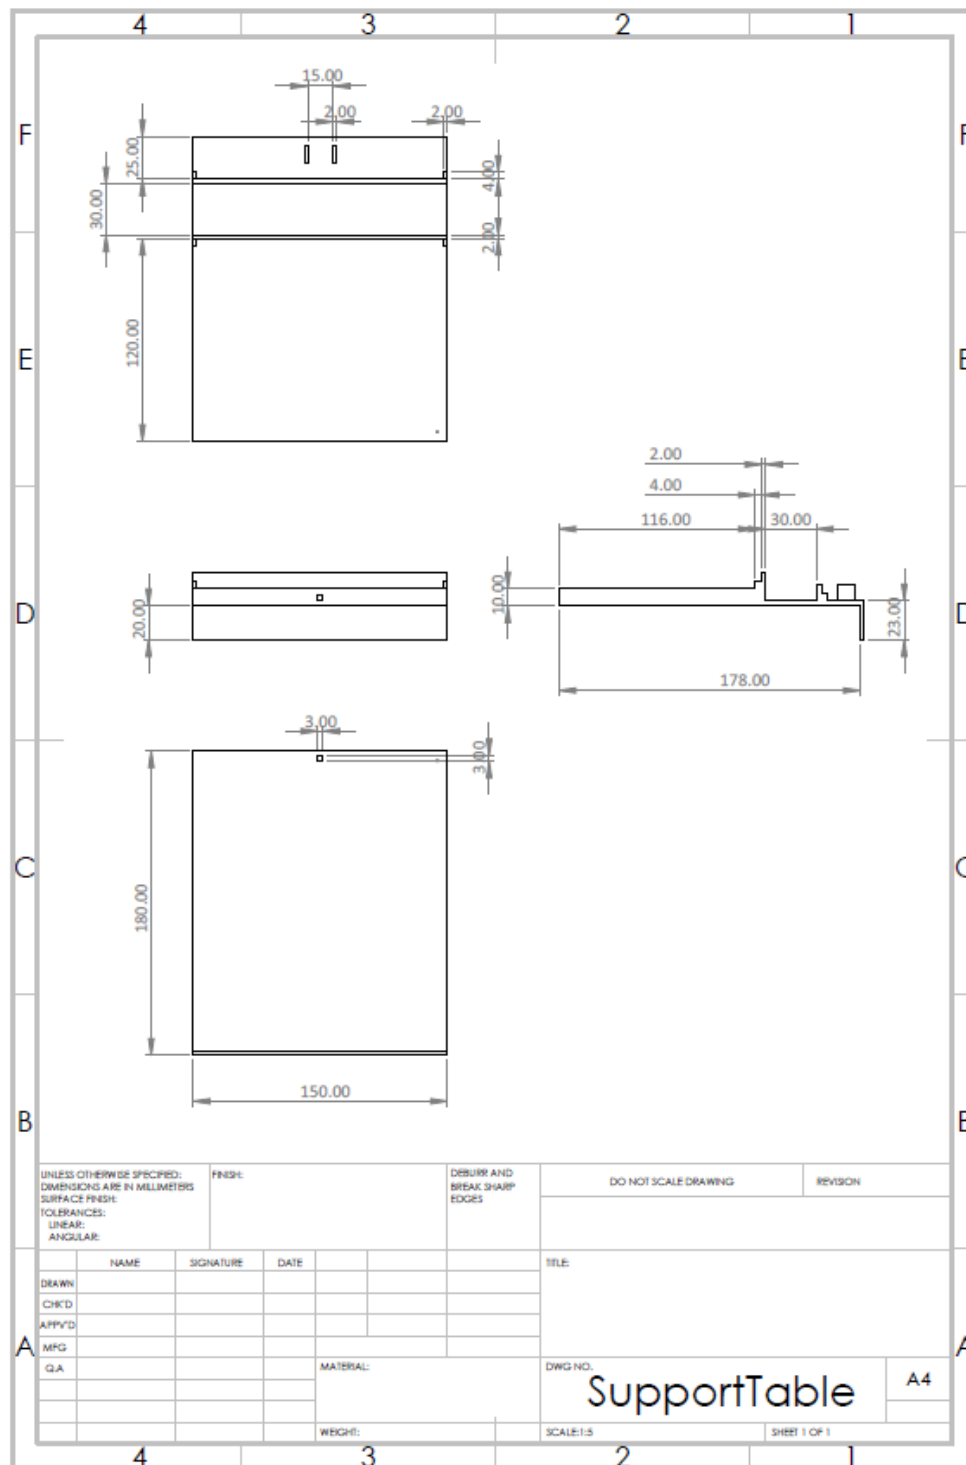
Dimensions of the 3D CAD Model of the Support-Table.
